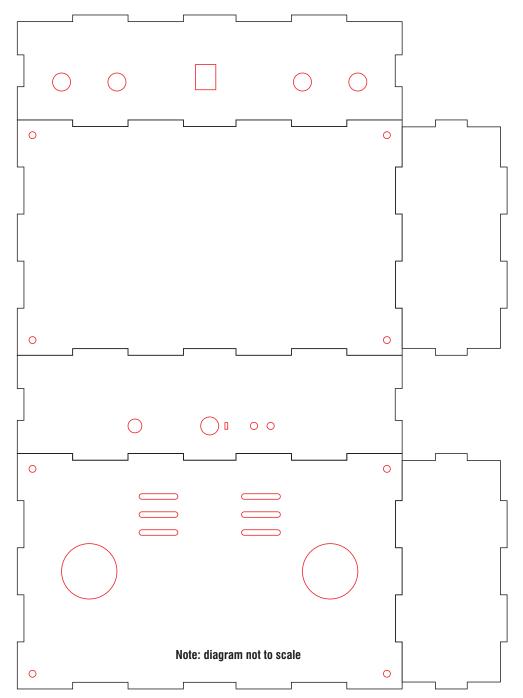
the laser cutting pattern used to produce the six pieces for the *Stereo Valve Preamplifier* case, from a 230 × 315mm piece of 3mm-thick clear acrylic (perspex). The sections shown in red are cut first to maximise precision of the hole placement. Note the cooling slots in the top cover, which go over the power supply circuitry. The prototype lacked an onboard power switch, so a hole has been added to the front panel for the final version (note: diagram *not* to scale).
